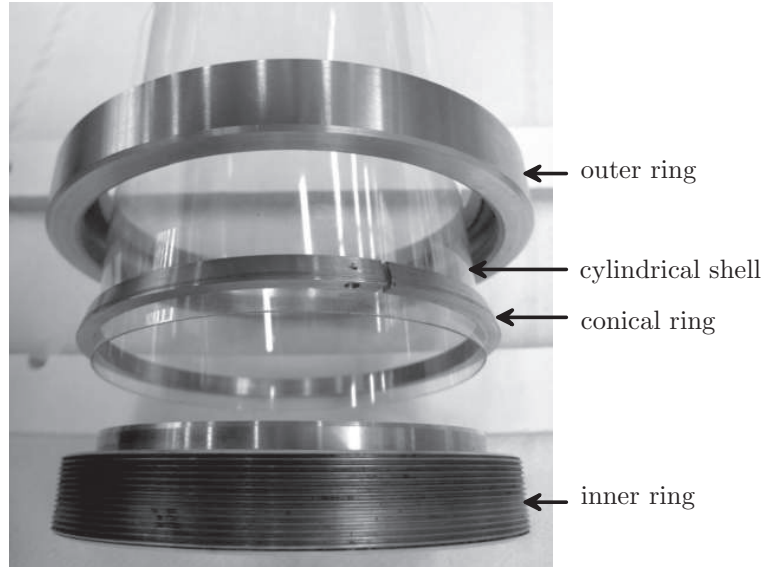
Exploded view of one clamping ring for cylindrical shell.
